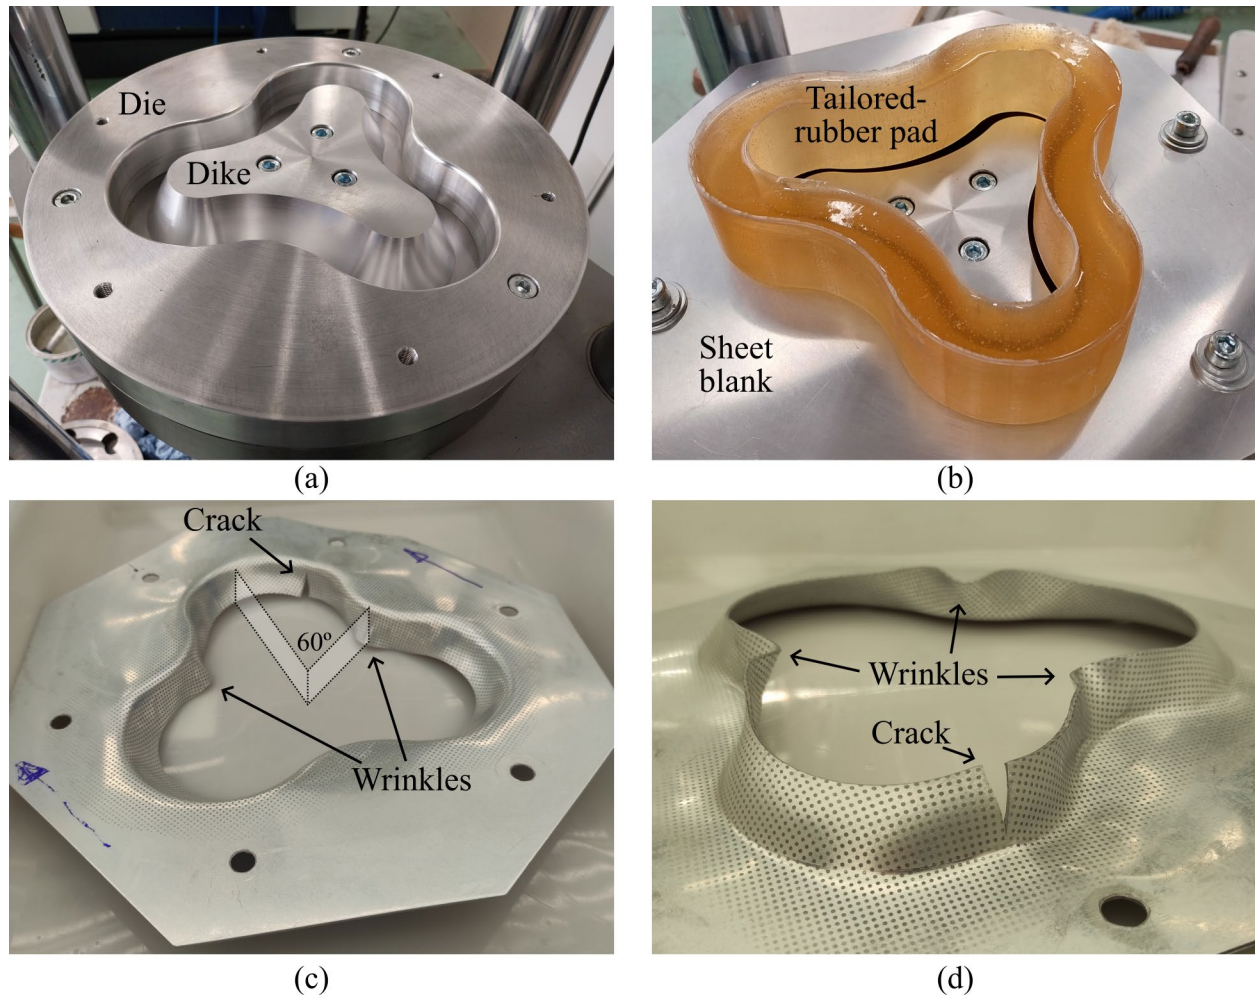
Experimental setup showing (a) die, dike, (b) tailored rubber pad, sheet blank, and (c-d) the manufactured part.
